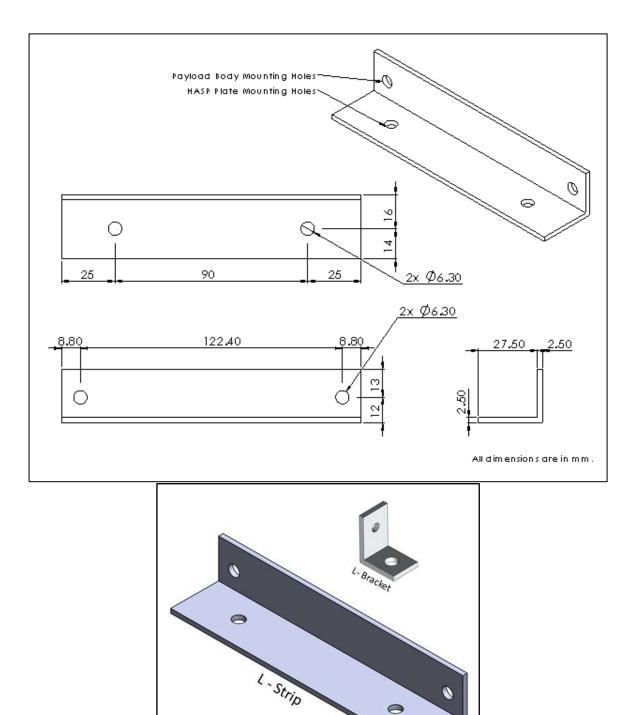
(n) Design of L-Strip for mounting the HASP plate with payload body and Design of L-Brackets for mounting the top lid on the payload body
